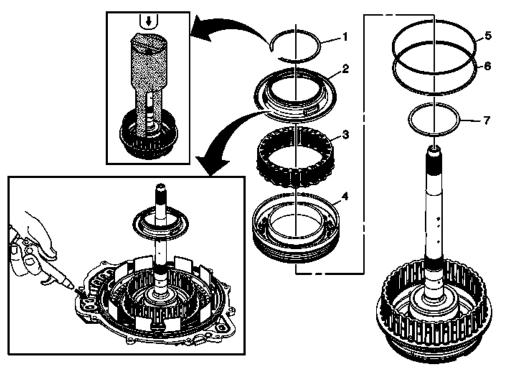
View Of Reaction Carrier Hub Assembly Courtesy of GENERAL MOTORS COMPANY
